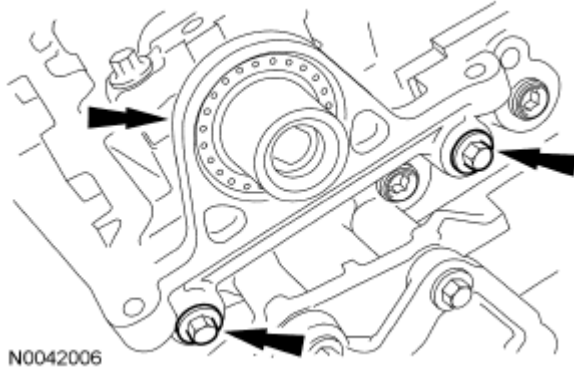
Locating Camshaft Oil Seal Retainer And Bolts
